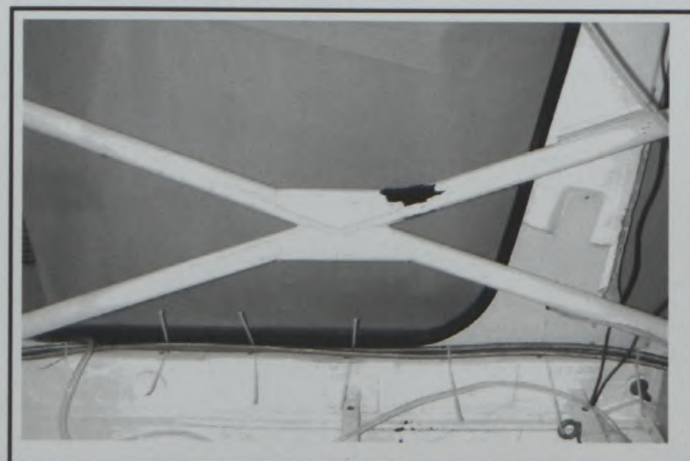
FRONT HOOP TO ROOF BAR
